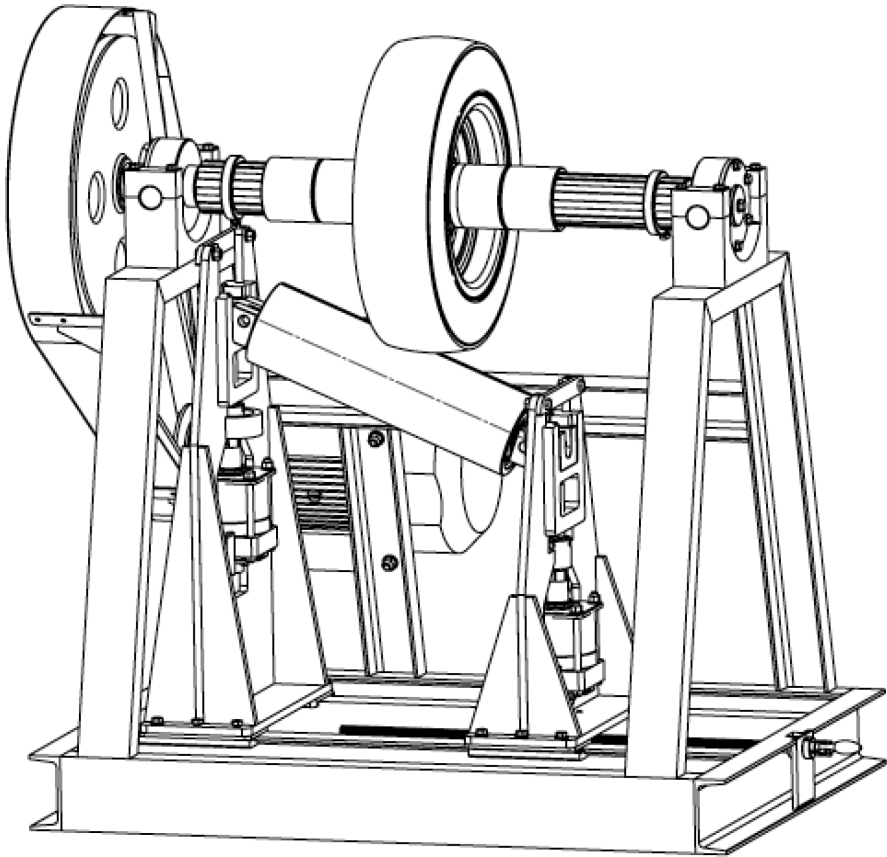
Conveyor idler testing machine in a position for wing conveyor idlers testing
